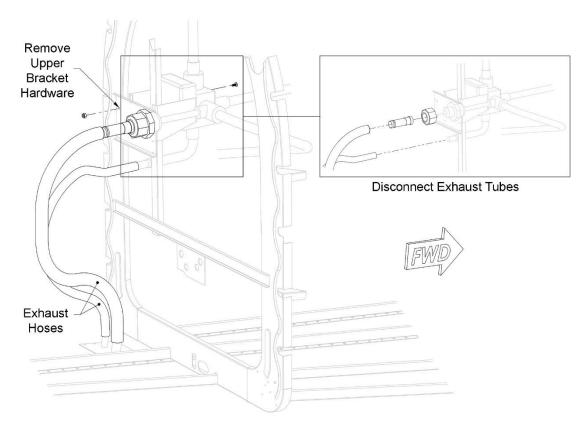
Removing Valve Bracket Hardware and Disconnecting Exhaust Tubes
